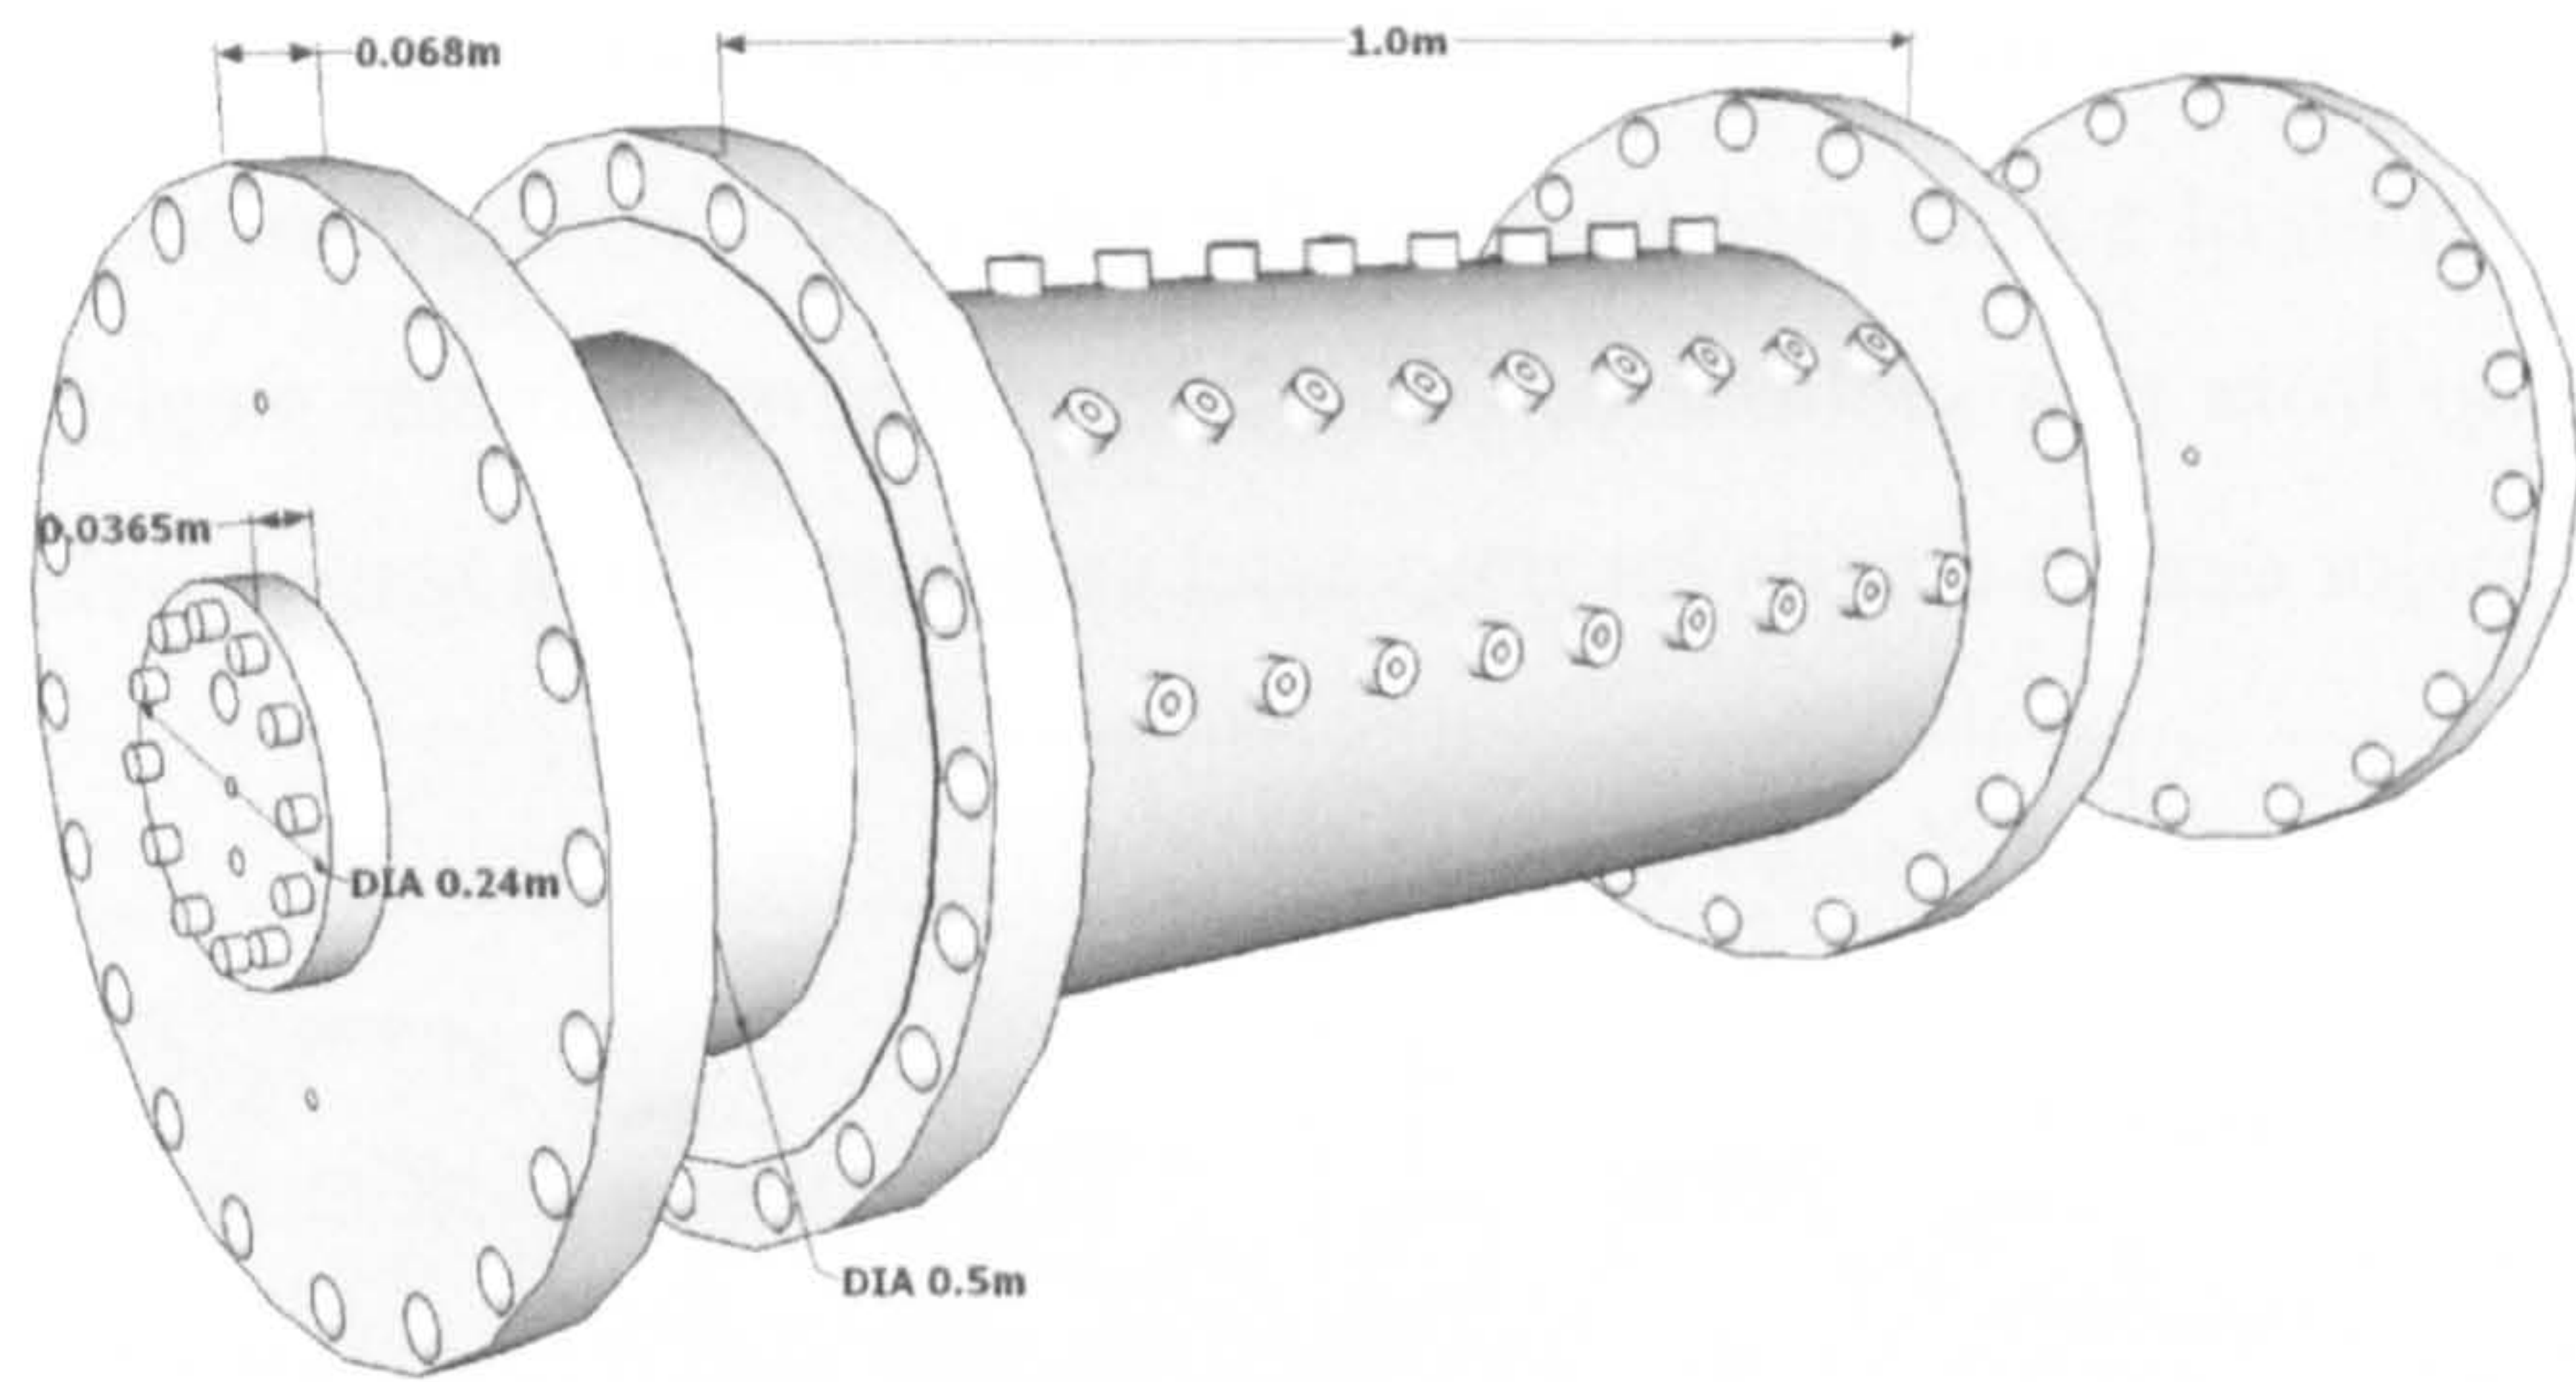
Schematic drawing of Test-vessel 1: Closed vessel geometry.
